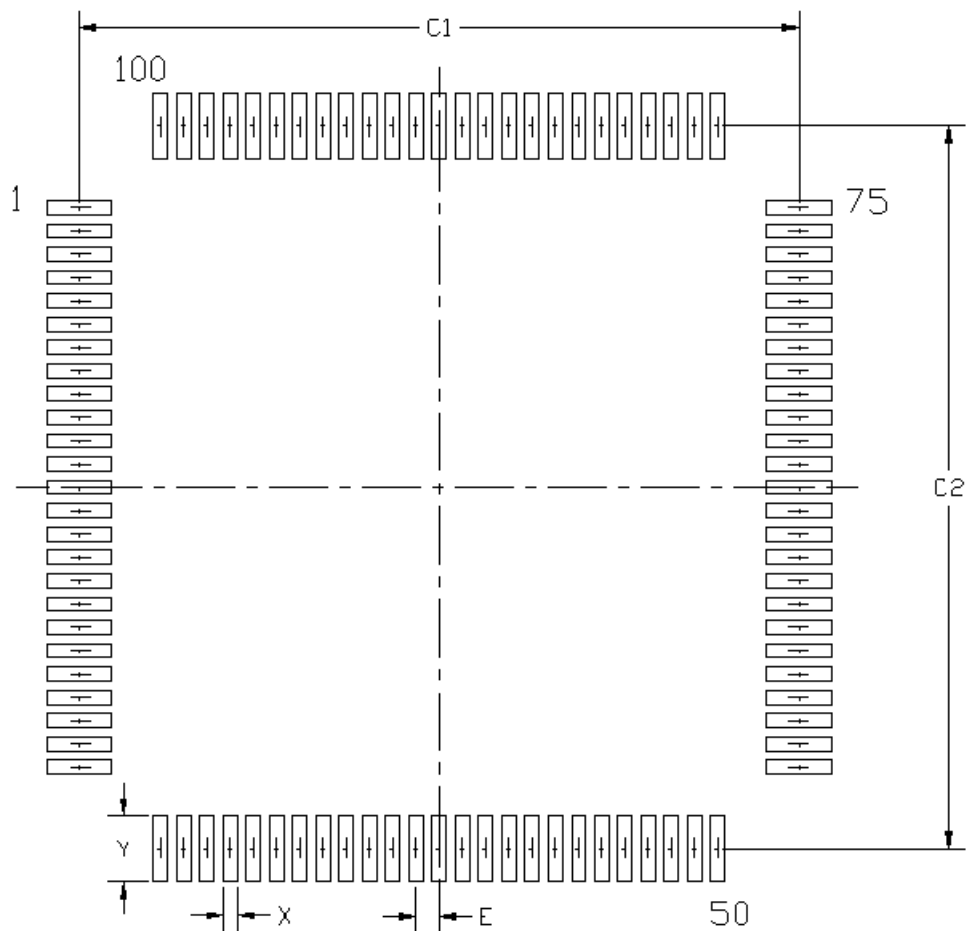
TQFP100 PCB Land Pattern Drawing
